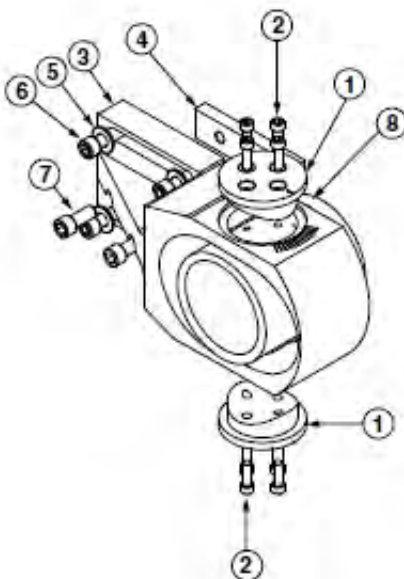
OUT OF ROUND TOOL SLIDE ASSEMBLY
